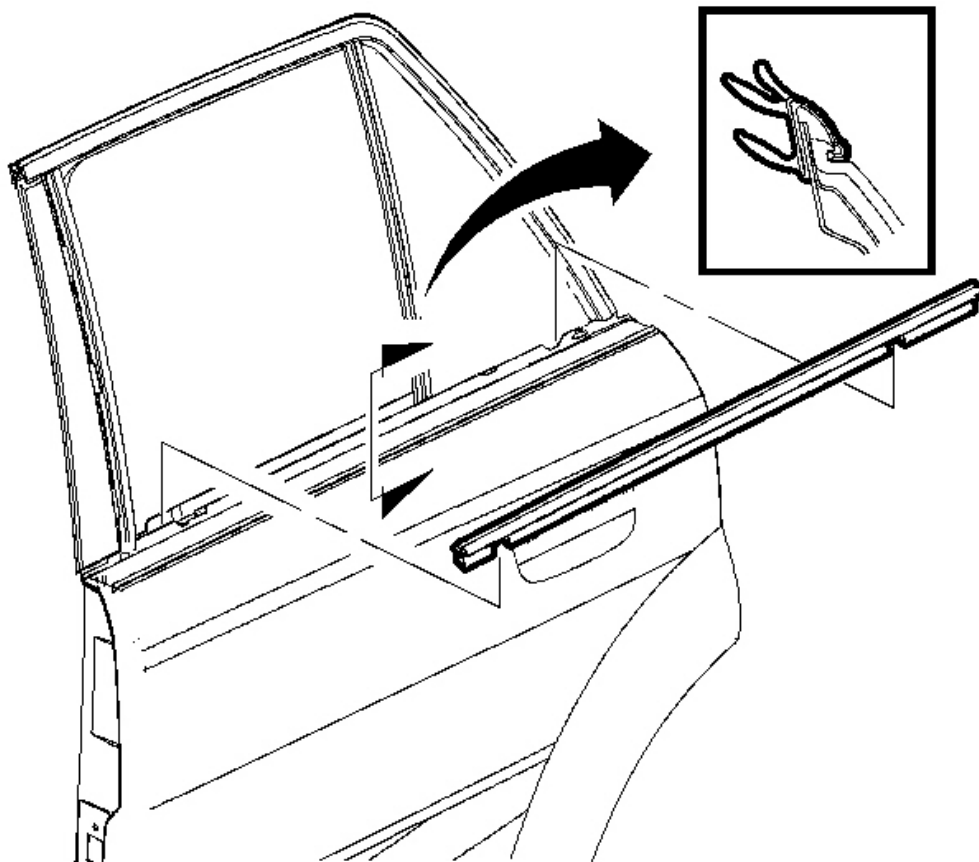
View Of Rear Door Window Outer Belt Sealing Strip
